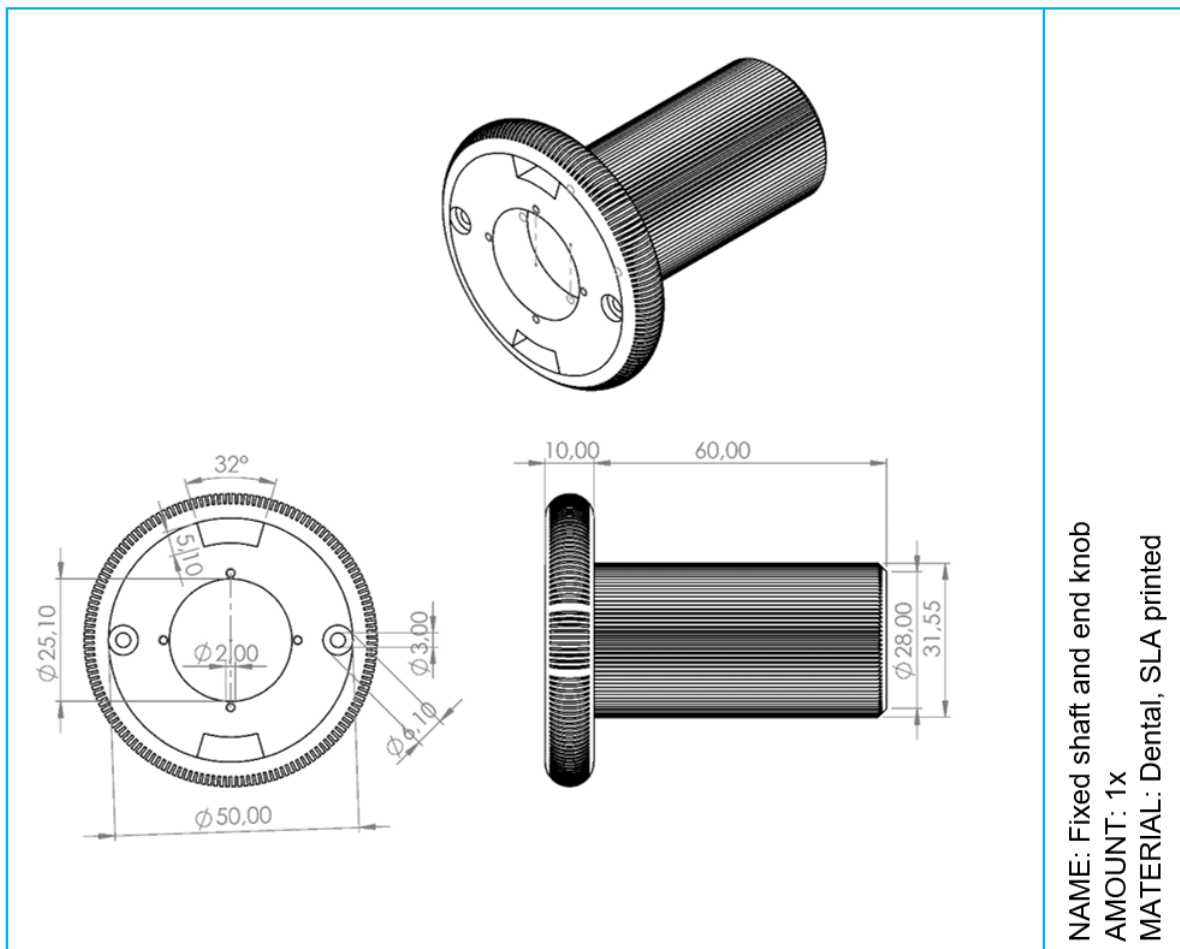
Construction drawings of fixed shaft and the end knob combination - 3D Printed prototype
